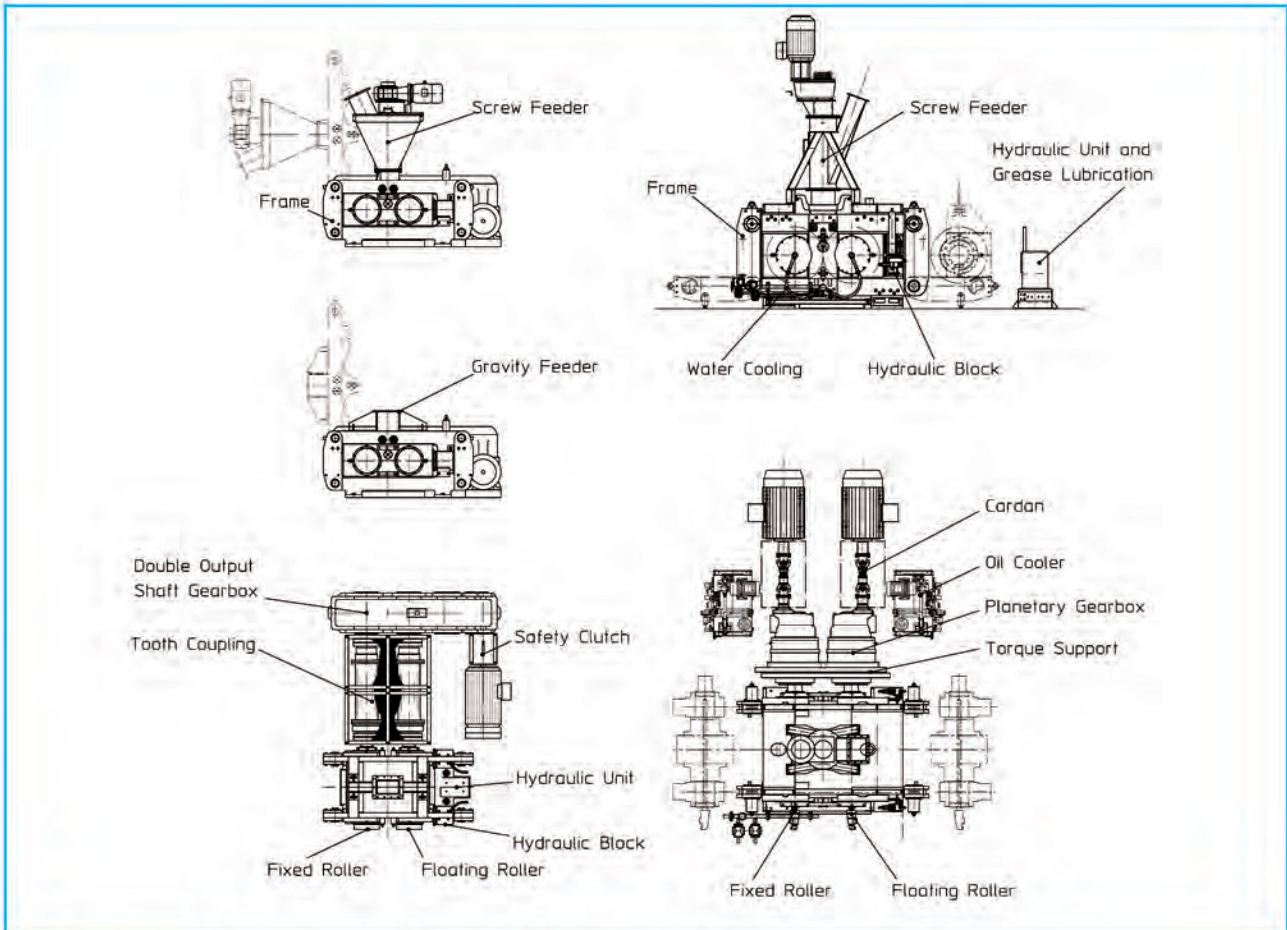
Left-hand - Roller press with standard frame and double output shaft drive system
